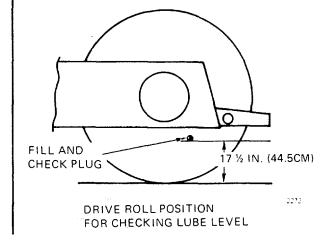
SERVICING C350B FINAL DRIVE ASSEMBLY.
